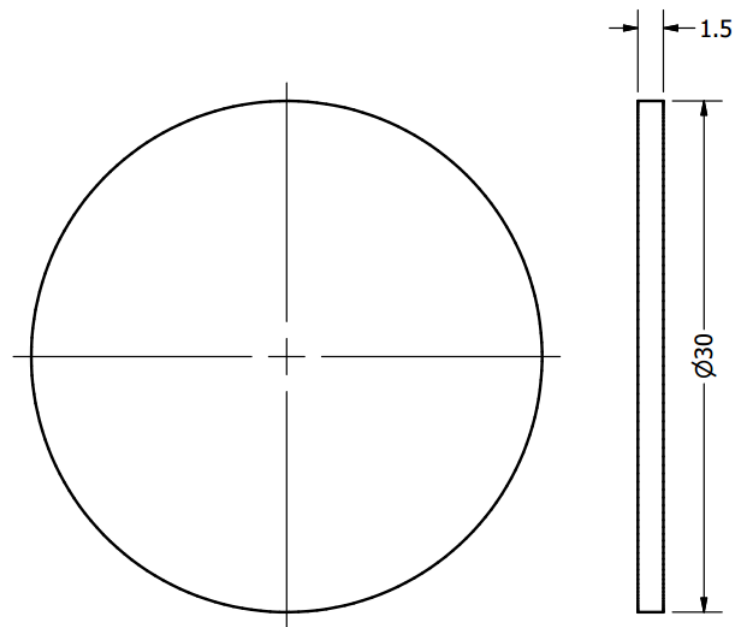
11 Small punch test sample geometry (dimensions in mm).
